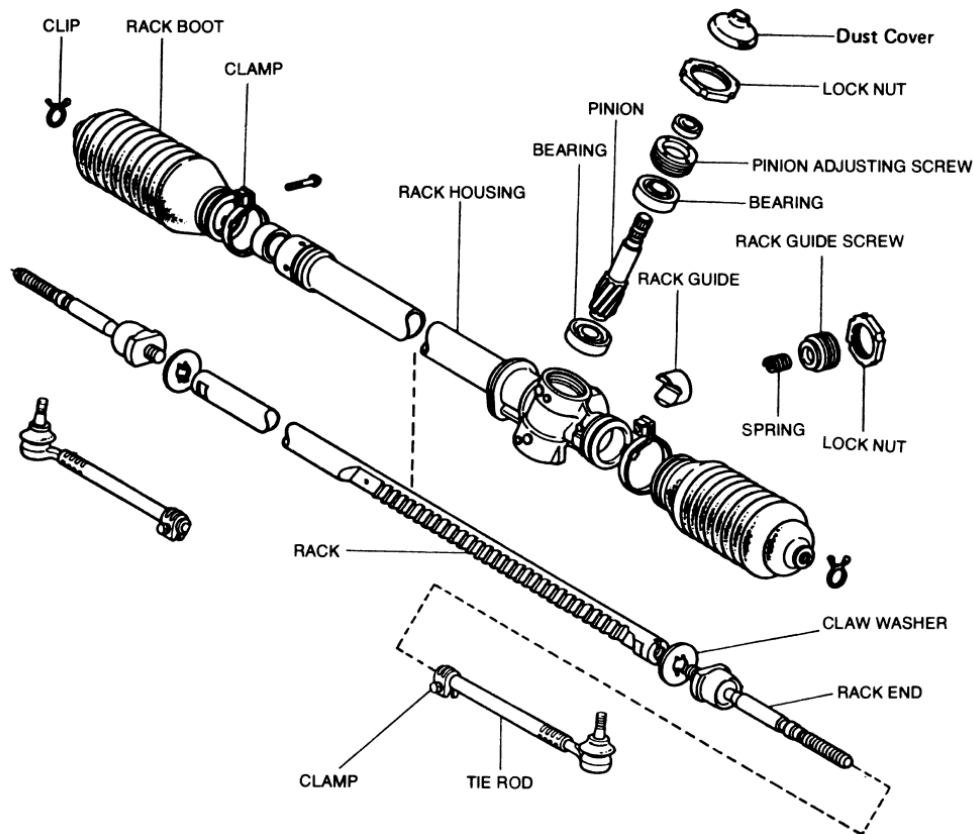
Rack and Pinion Steering Gear Exploded View
